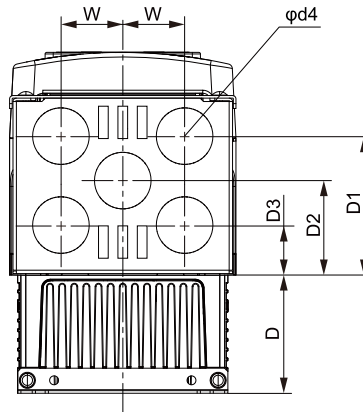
Exterior and Mounting Dimensions Diagram 1 (Models: 2004 to 2042 and 4002 to 4023)
